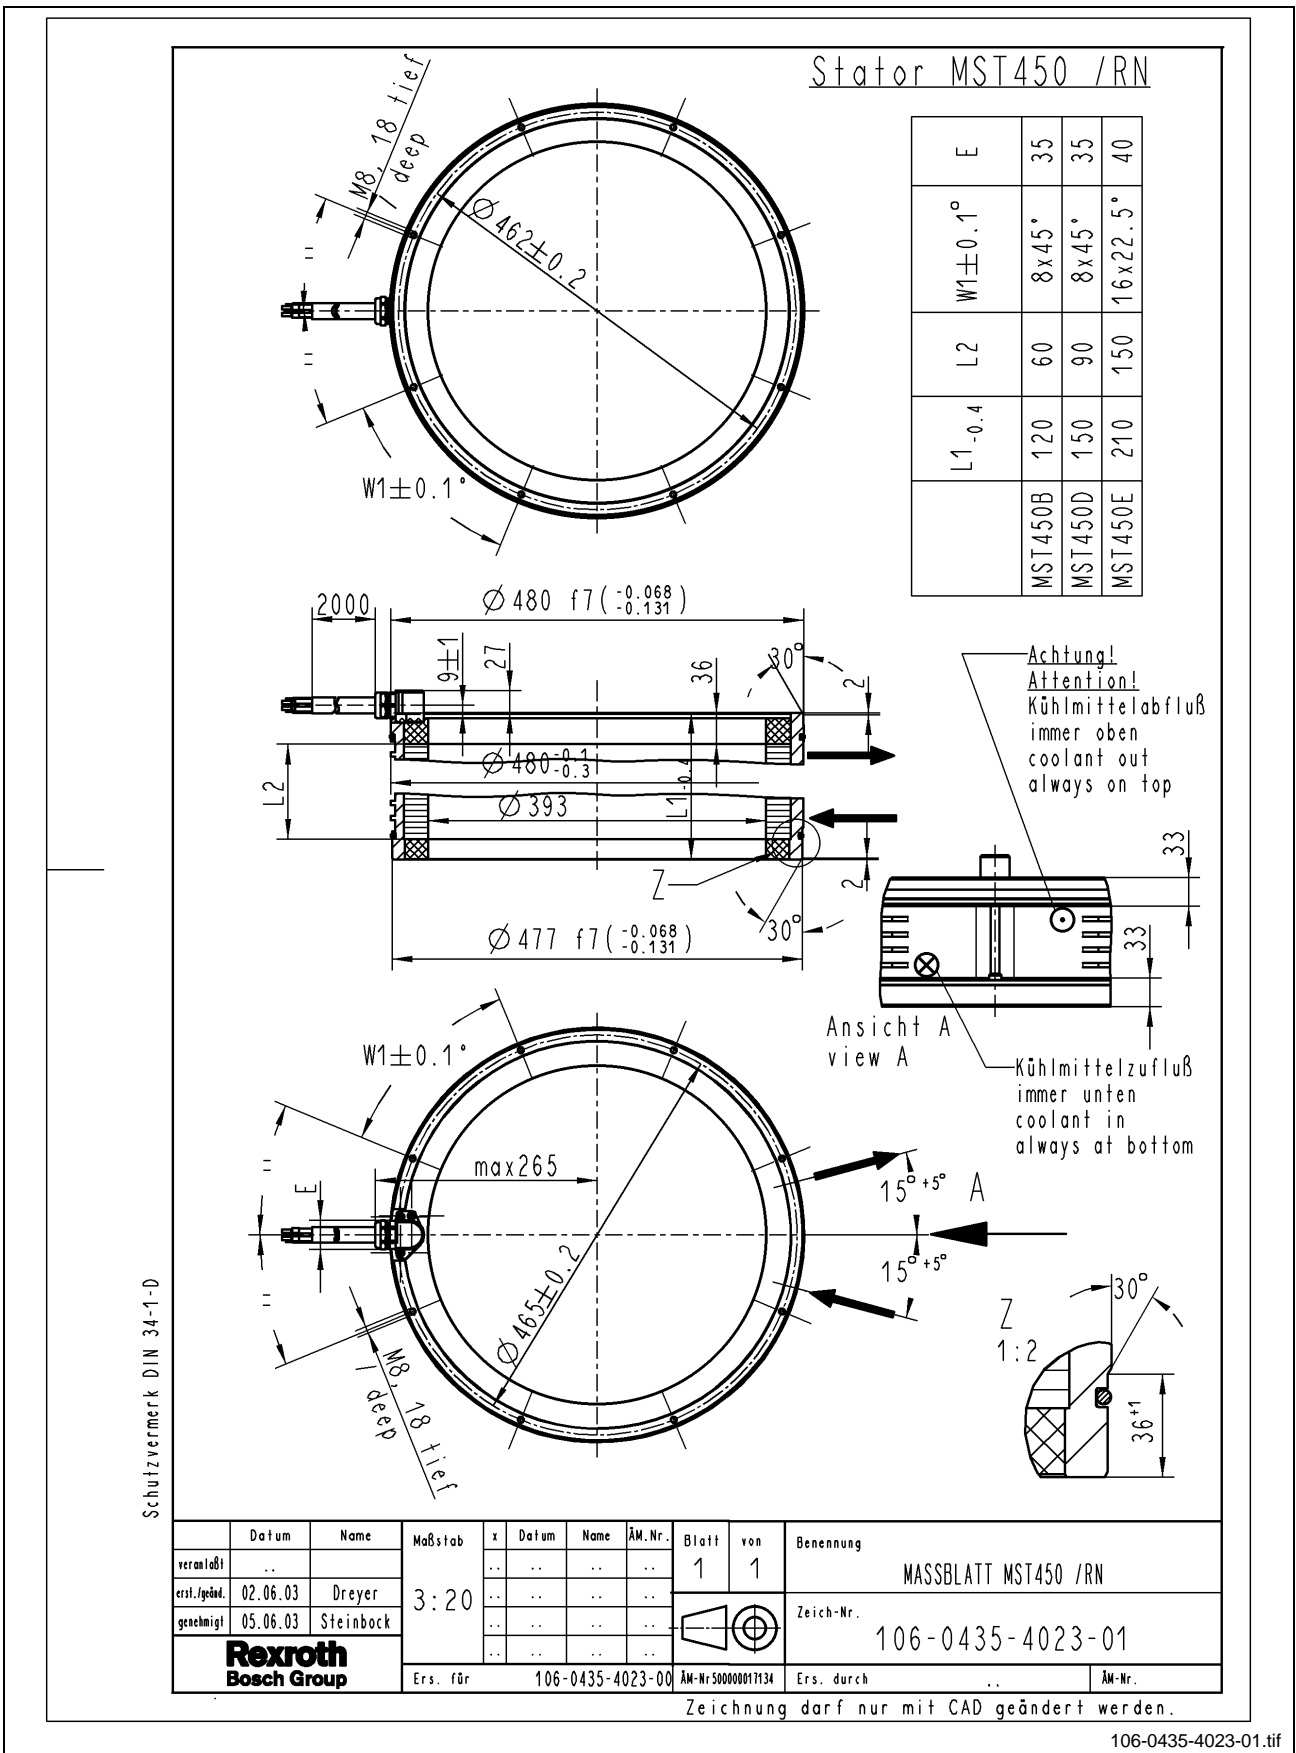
Dimension sheet MST450, electrical connection "RN"
